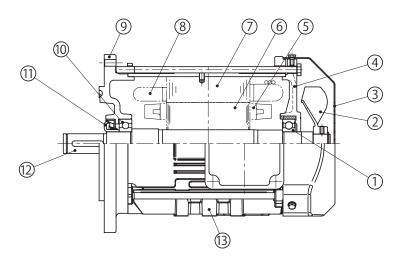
Direct-coupled motor for CYCLO Drive (Sealed bearing, oil seal structure) (Example: N-100L 2.2kW 4P)
